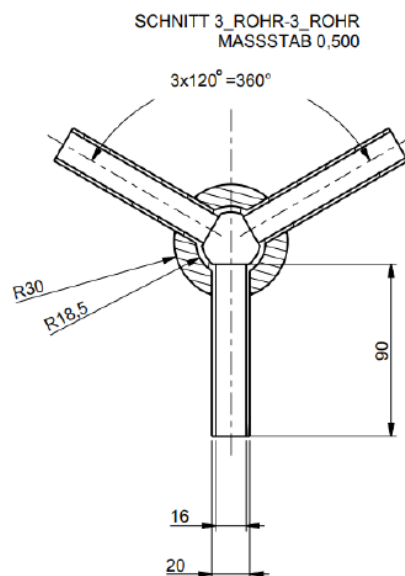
TECHNICAL DRAWING OF THE THREE-PIPES OIL CONVEYOR
